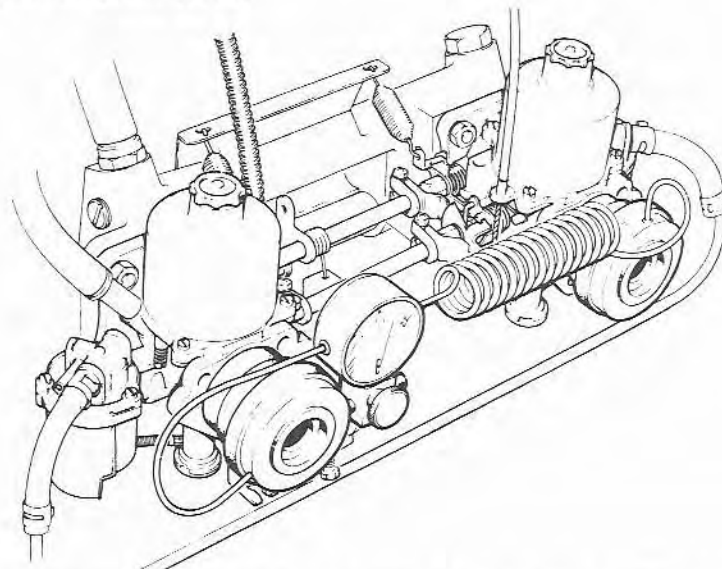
Using an airflow balancing meter on a twin HS carburettor installation (Sec 9)
